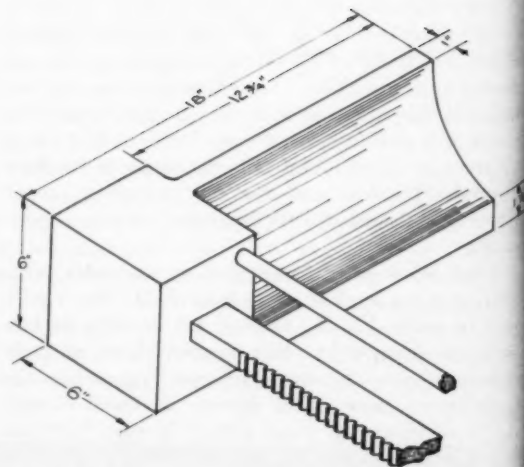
Approximate dimensions of Universal Wheel Chock (carrier) FSN 1730-602-6438-S030.
